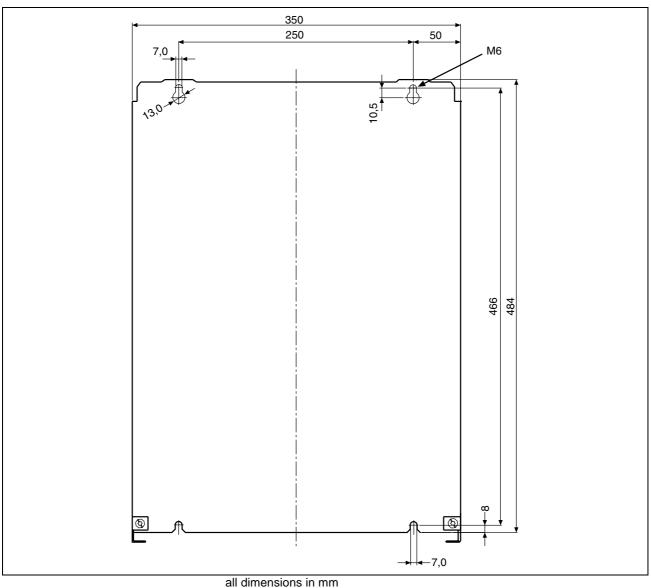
Boring dimensions HCS03.1E-W0210
